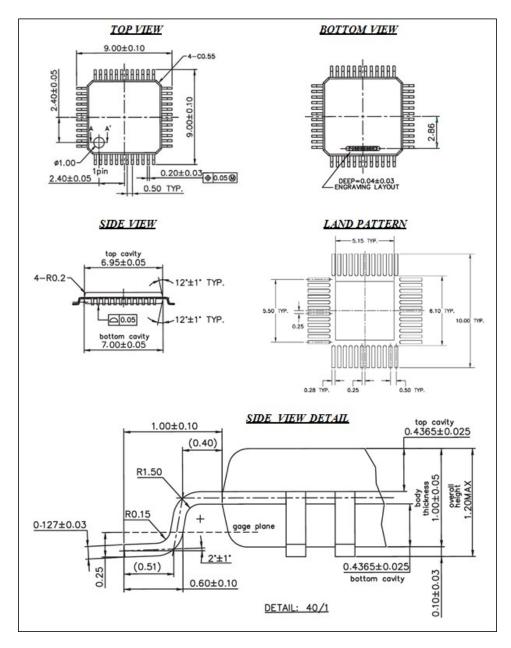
Cirque Pinnacle ASIC 48-Pin QFN Package Mechanical Drawing
